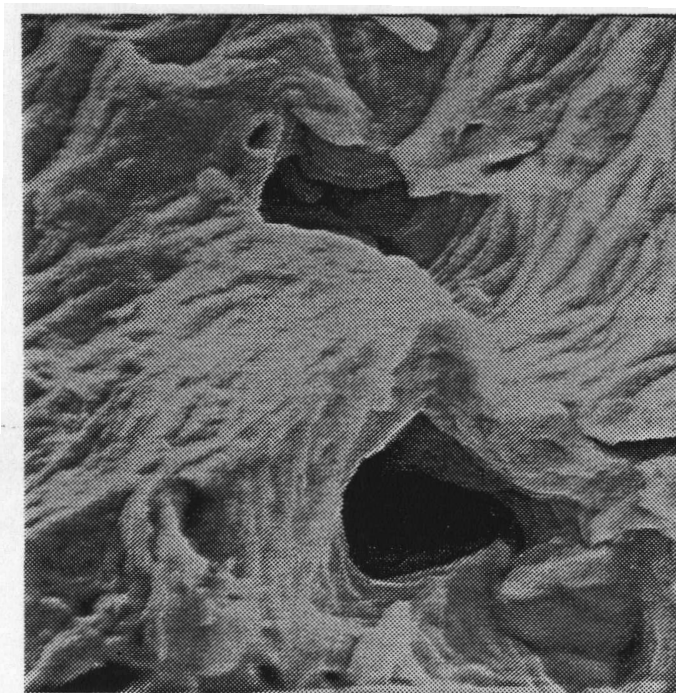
SEM Fractograph at 4400X of Fracture Surface of Sample No. 4 , Showing Fatigue Striations.
